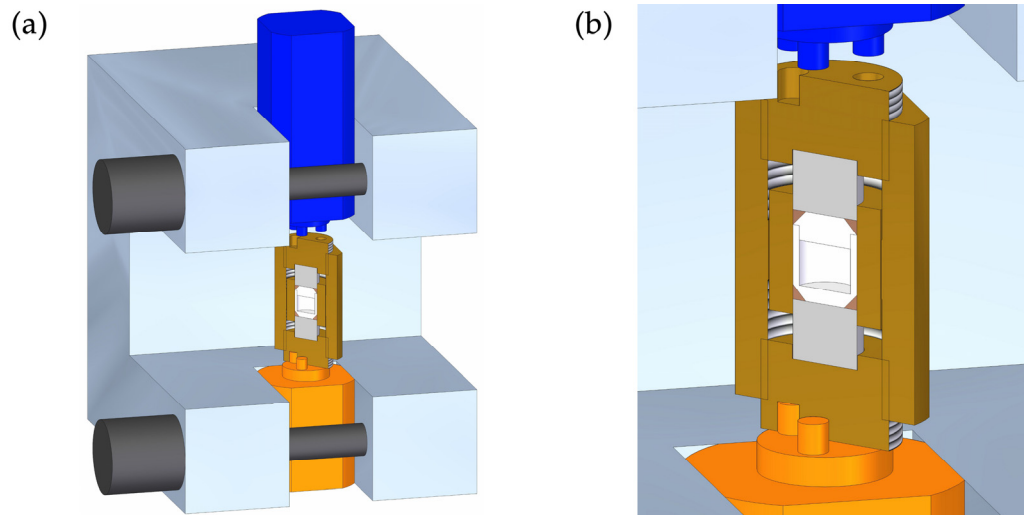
(a) Computer-aided design drawing of the clamp for applying load to the TM-PCC. (b) Detail view of the TM-PCC mounted on the clamp.
